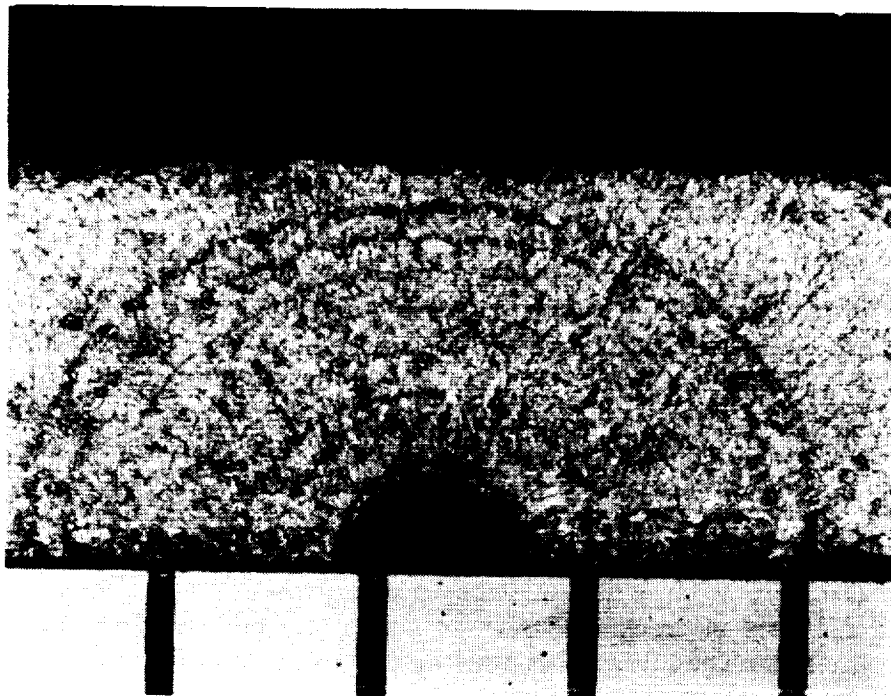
Fracture surface of a range marked part-through crack specimen.
